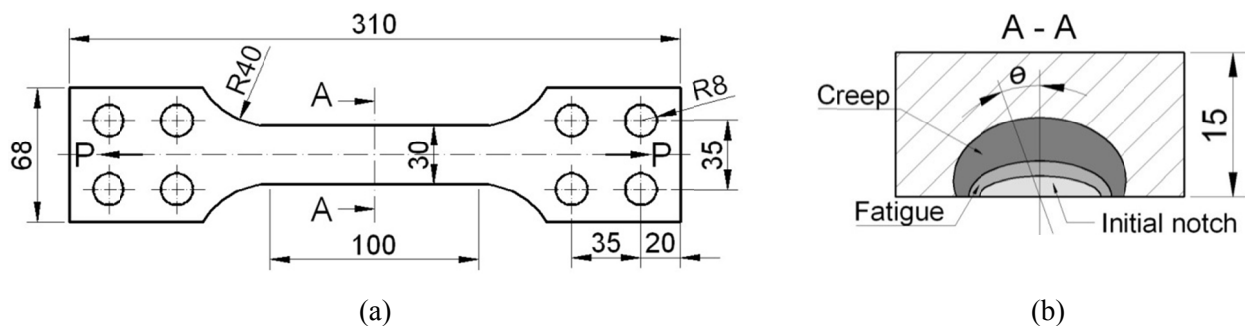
Geometry of a thumbnail crack specimen: (a) a whole geometry; (b) an enlarged section view on A-A.
